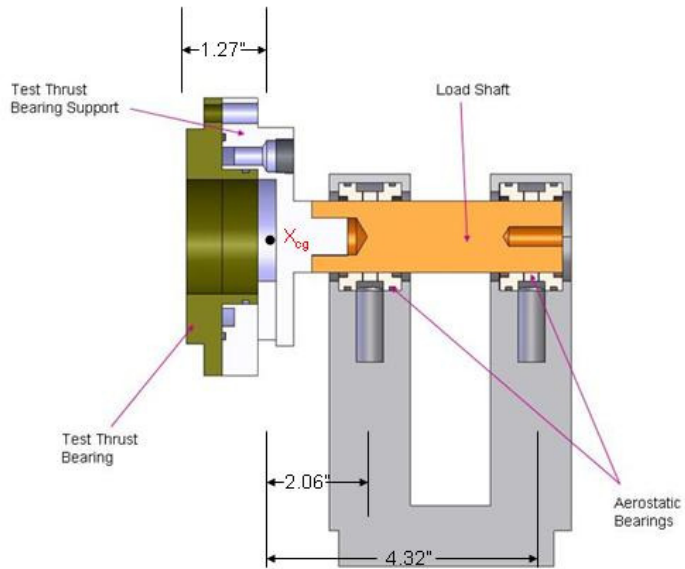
Cross-sectional view of load shaft, test thrust bearing and aerostatic bearings
